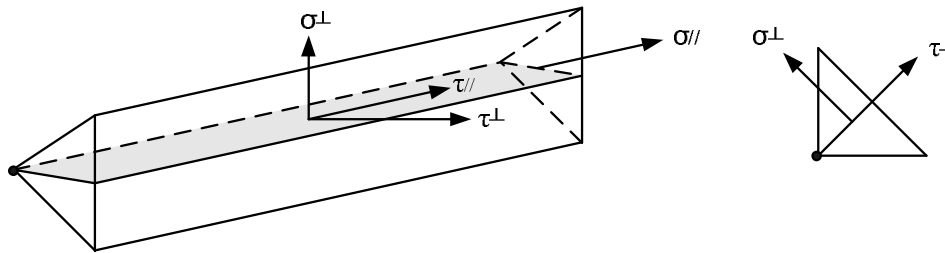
stresses on the throat section of a fillet weld.
